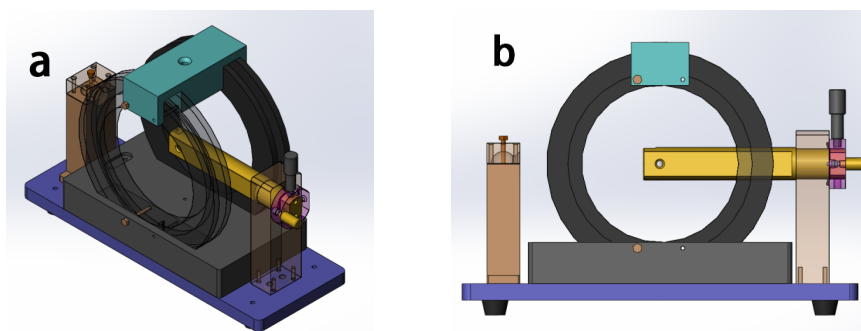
Design of R120 Helmholtz coil (a) axonometric drawing, (b) frontal view.
